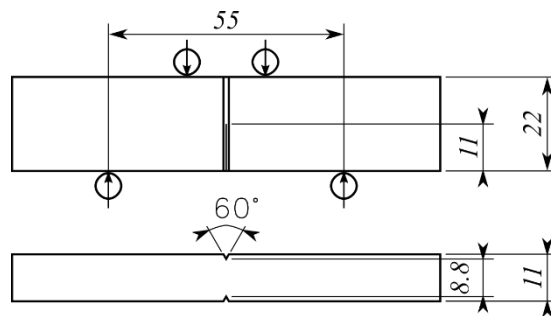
Single Edge Notched Bending specimen geometry and nominal dimensions (in mm).
